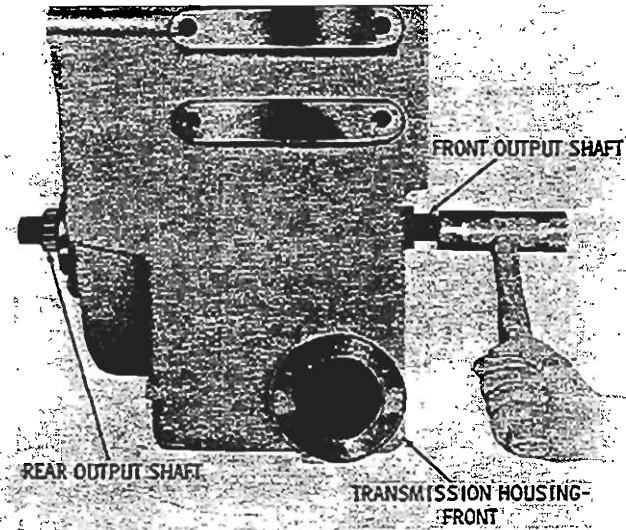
LOOSENING ONE-PIECE OUTPUT SHAFT FRONT BEARING
